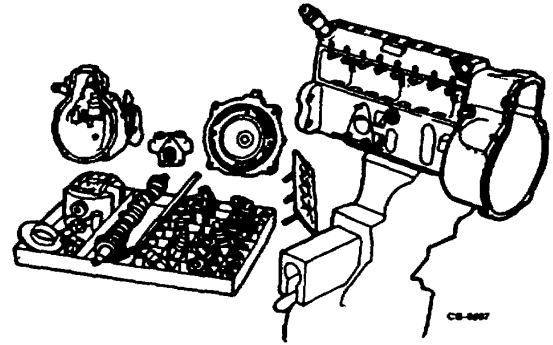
Disassembled Pump - Cleaned,, Inspected, Reconditioned and Ready for Reassembly
